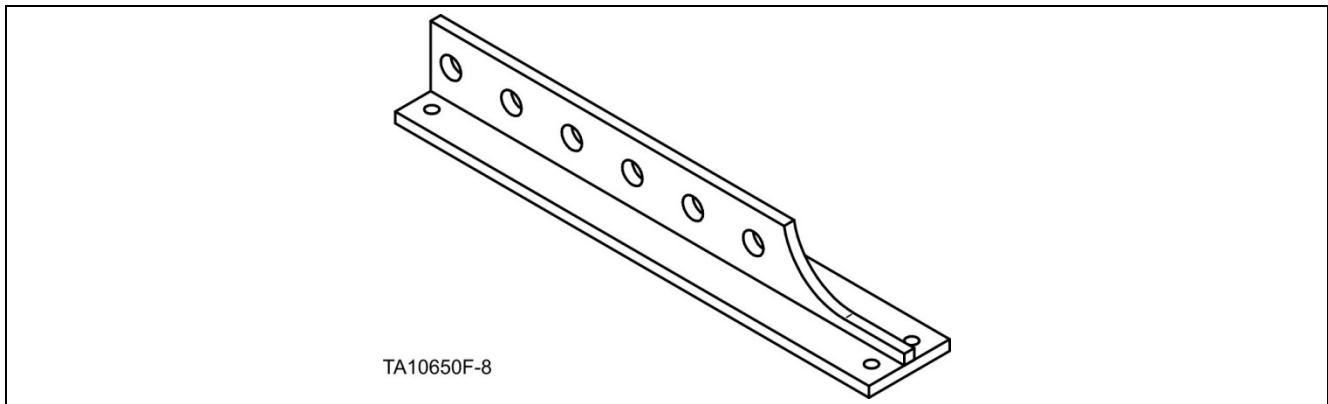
Generator lifting fixture (illustrated is fixture used on ac generator 12b)
